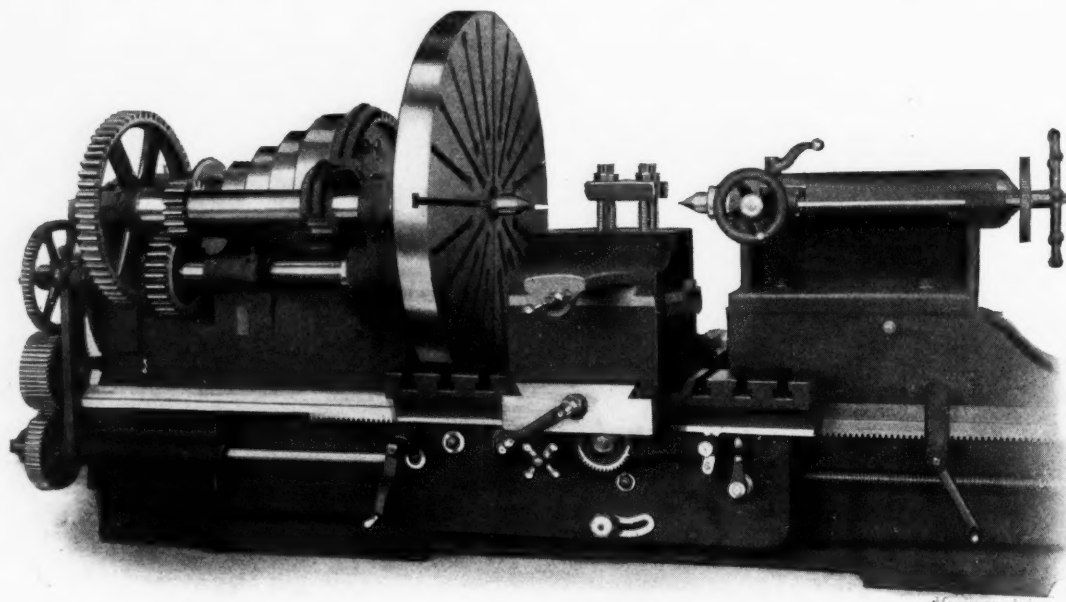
An Example of a New Line of Heavy Engine Lathes
